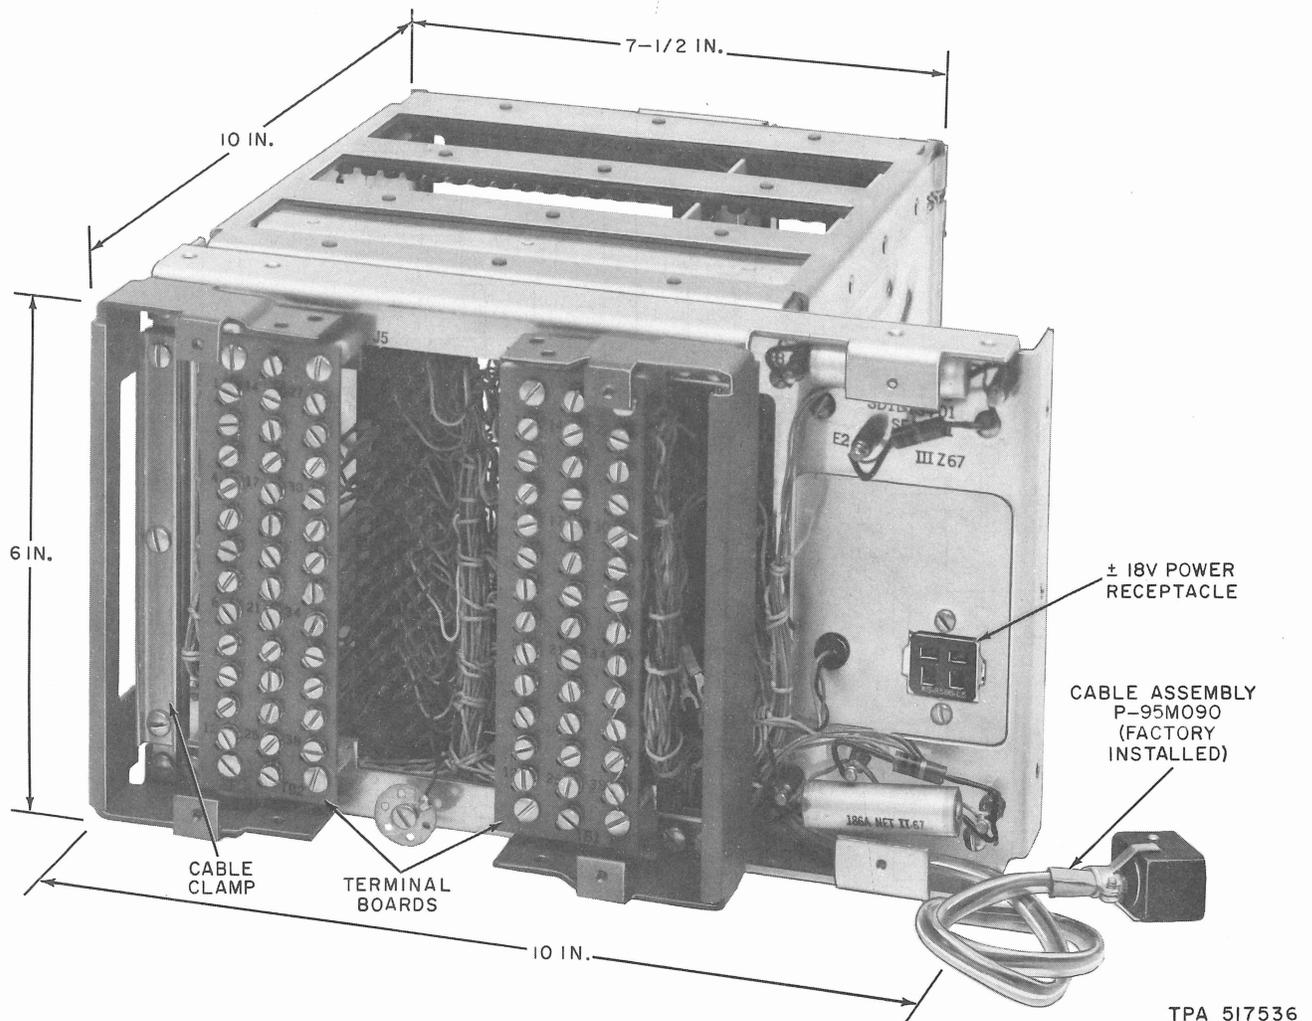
Data Auxiliary Set 824A1, Rear View (Covers Removed)
